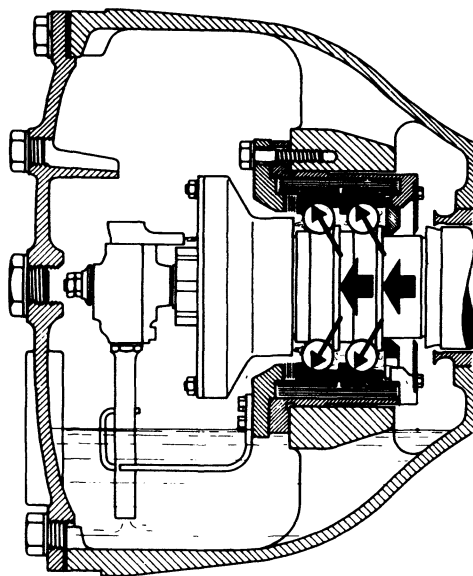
Rolling bearing with auxiliary plain thrust bearing (Brown Boveri)
